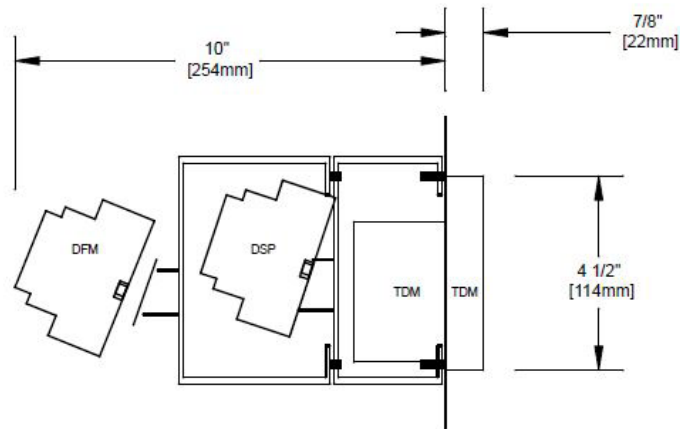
DSP-223-X-TDM - DIN rail mounting detail - Side View
